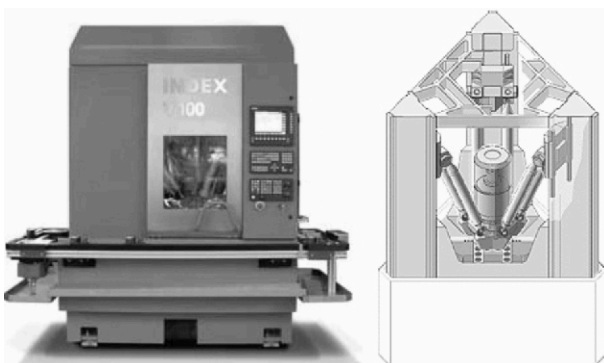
Vertical parallel kinematic turning machine V100 [52]
